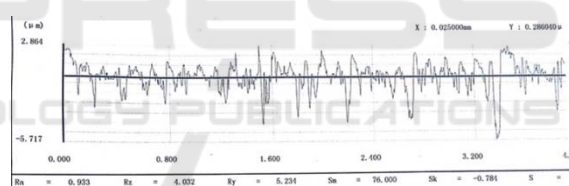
Surface roughness measurement result of NC milling workpiece 05(R40, n800,F100,ap2).
